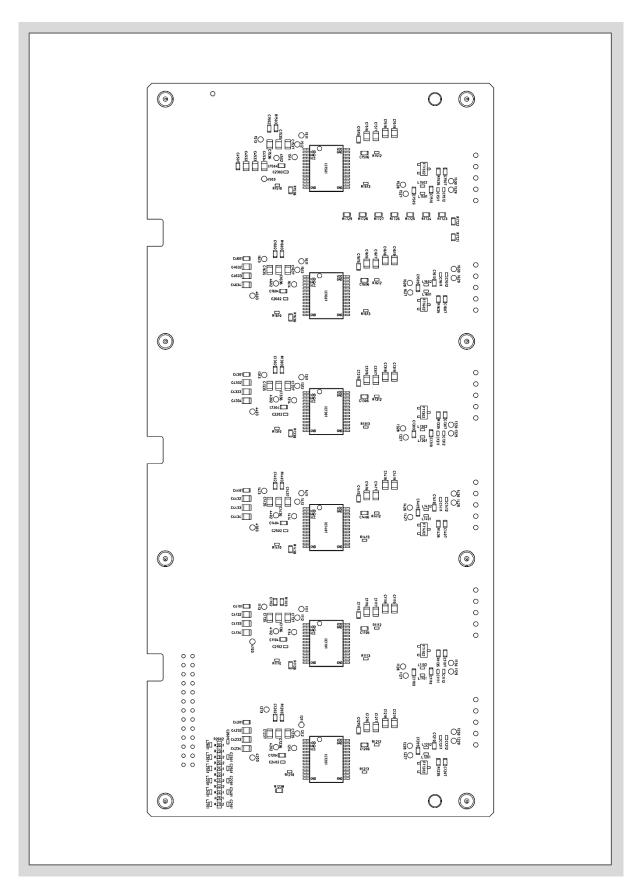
Assembly drawing of the driver board (Bottom)
